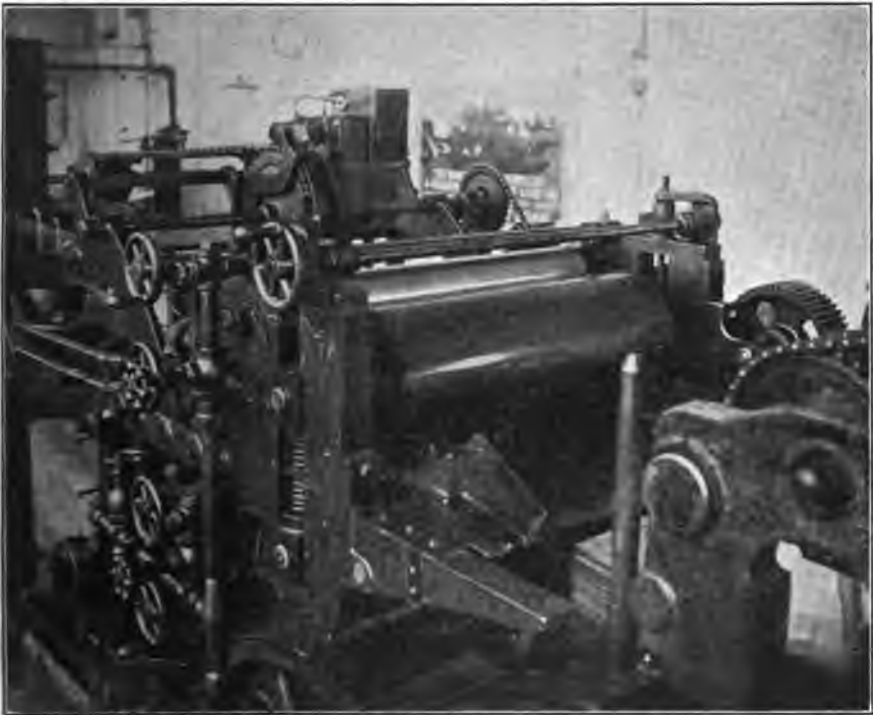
THE COATING ROLLS SHOWING PARALLEL ADJUSTING GEARS.
